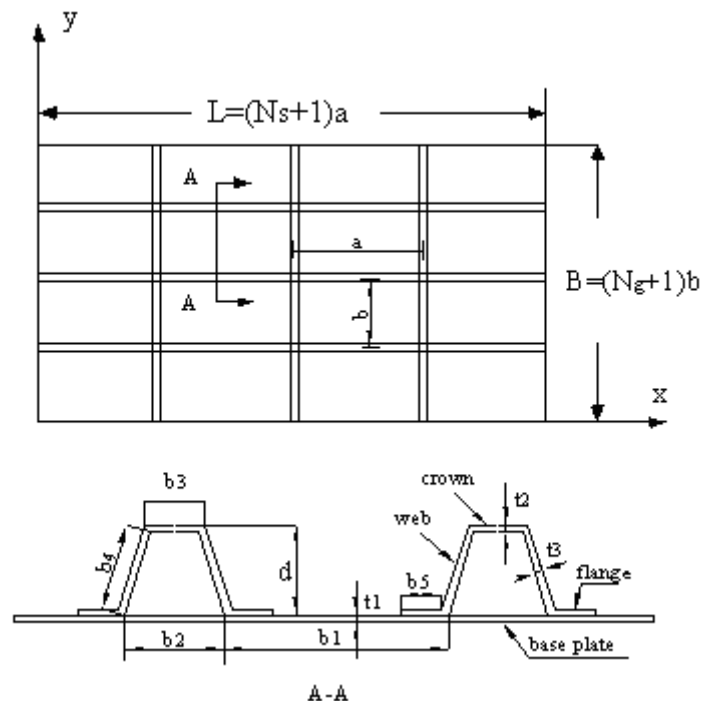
Orthogonally stiffened panel configuration with the hat-section stiffeners
